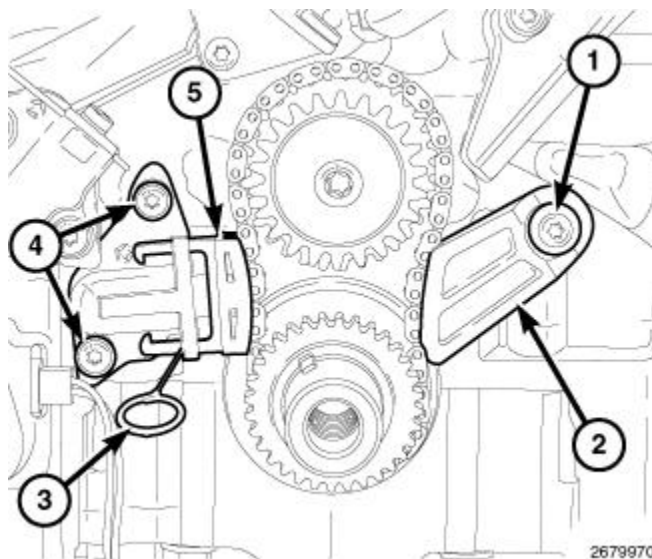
Primary Chain Tensioner, Tensioner Pin, Primary Chain Guide & Bolts
